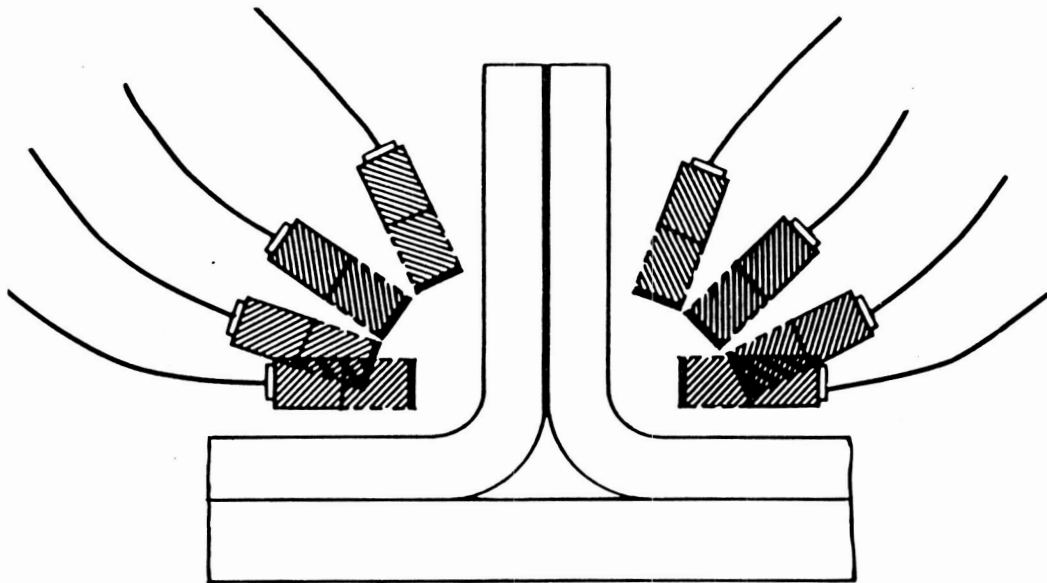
Transducer Array for NDE Inspection of Stringer Radius
